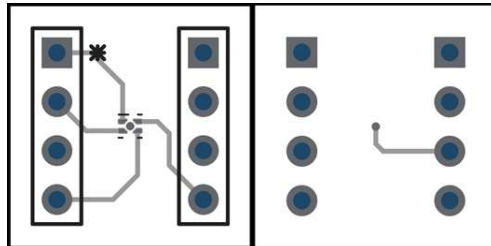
DPW package top layer (left) and bottom layer (right) PCB layout
